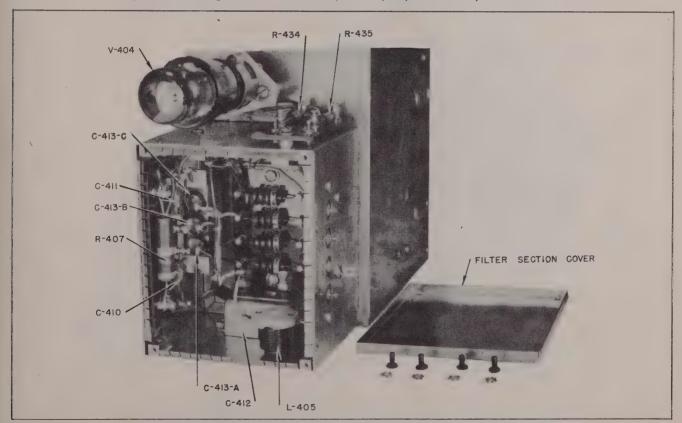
Signal Generator Unit, Top View, Filter Cover Removed
